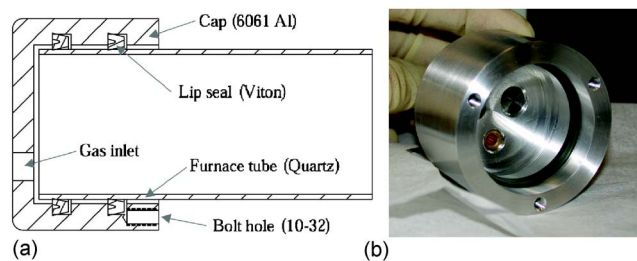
(Color online) Elastokinematically constrained furnace tube end caps using lip seals: (a) Cross-section drawing showing Viton seals recessed in grooved aluminum and (b) cap seal for 46 mm o.d. quartz tube, with one lip seal.
